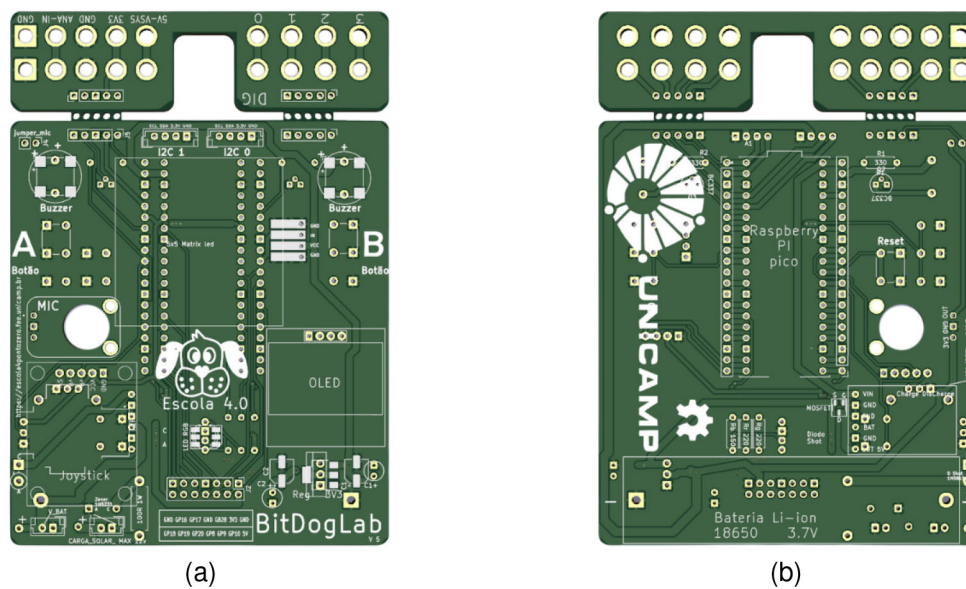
Layout design of the BitDogLab PCB: (a) front and (b) back side.
